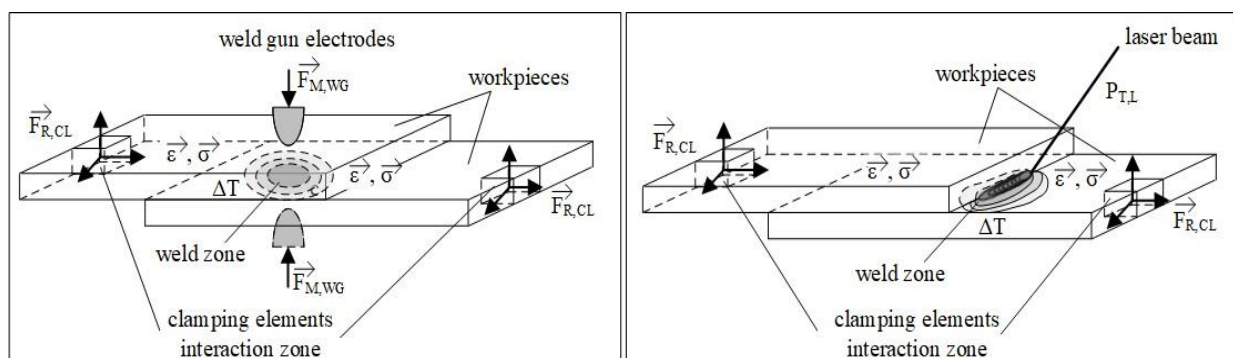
Welding tool impact and reaction forces at clamping elements during resistance spot welding (left) and laser beam welding (right)
